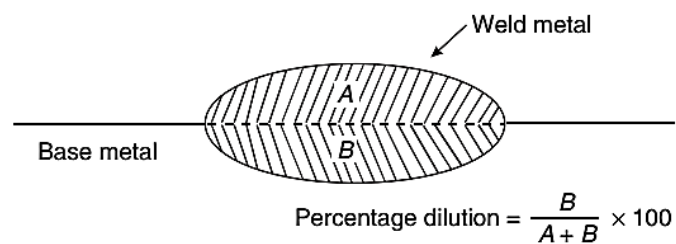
Schematic diagram for welding dilution [17]
